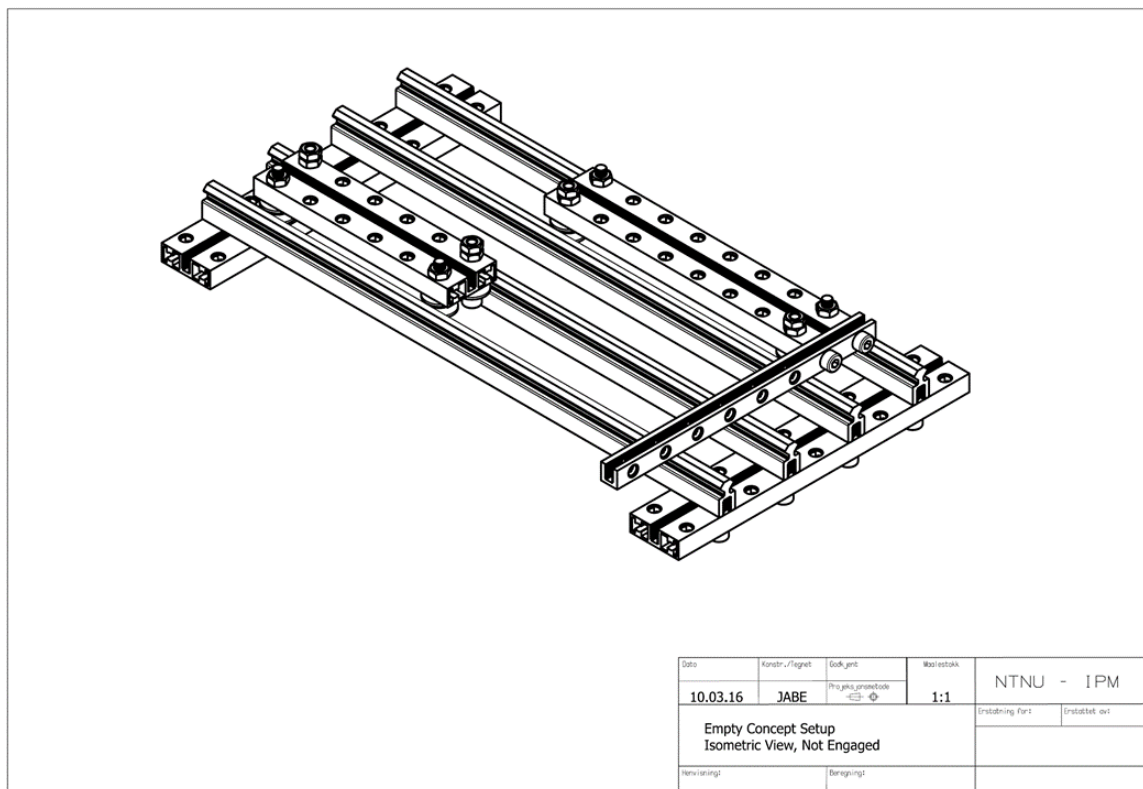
Example of a blank technical drawing. Four views were included in this handout; disengaged top view, disengaged isometric view, engaged top view and engaged isometric view.
